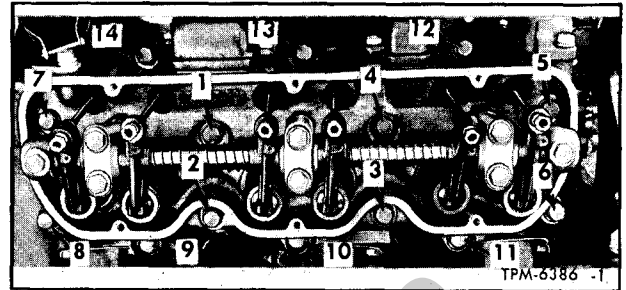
Cylinder Head Bolt Tightening Sequence on V6 Engine
